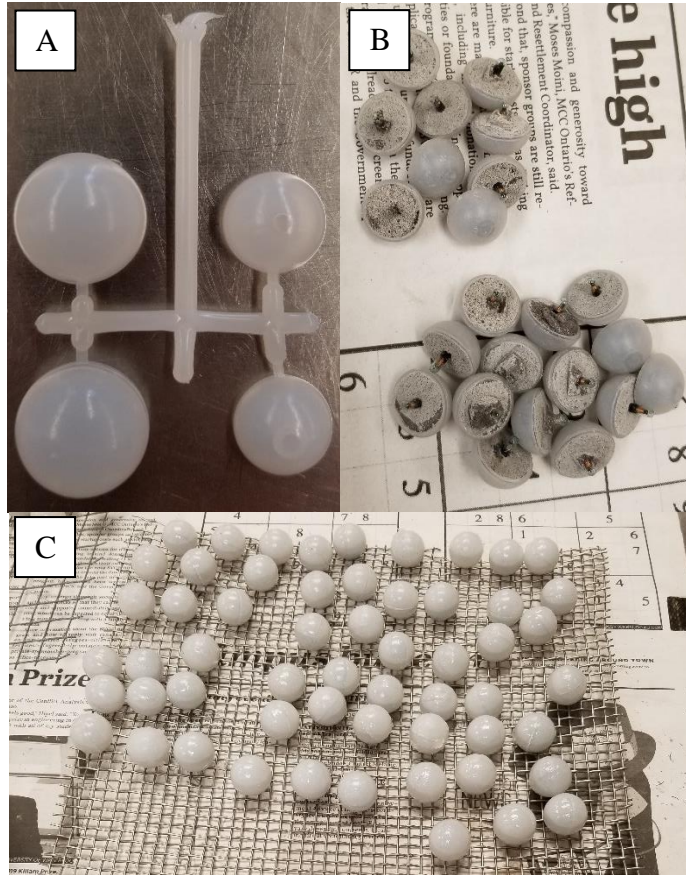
Wobblestone insert parts and assembly stages. (A) Raw part cast from HDPE injection mold. (B) Weighted inner ball bottom halves containing RFID tags. (C) Assembled Wobblestone inserts.
